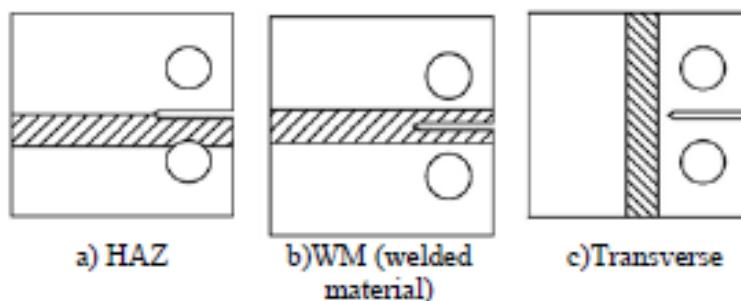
Notches orientations at fracture toughness testing of FSW weld joints
